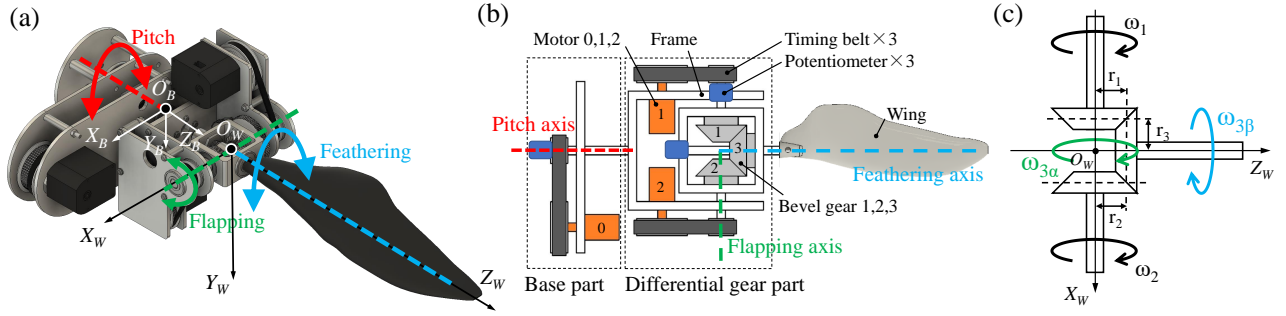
(a) Driving mechanism of the robotic penguin wing; (b) schematic drawing of the differential gear mechanism for realizing the flapping and feathering motions; (c) coordinate systems and 3-DoF motion realized in the robotic penguin wing.
